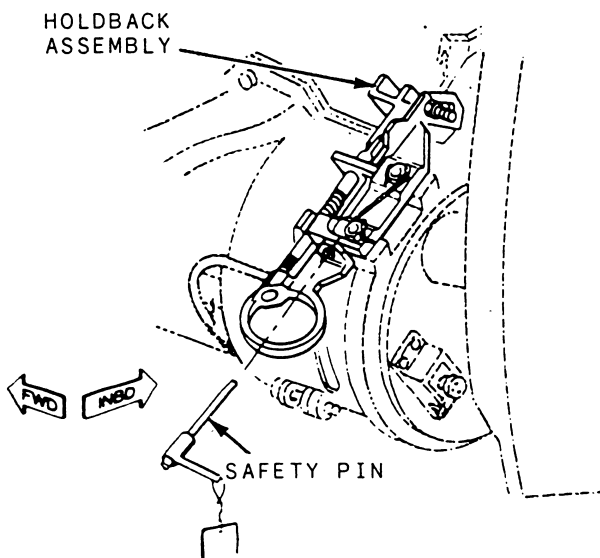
F-14 clearing sector holdback assembly and safety pin.
